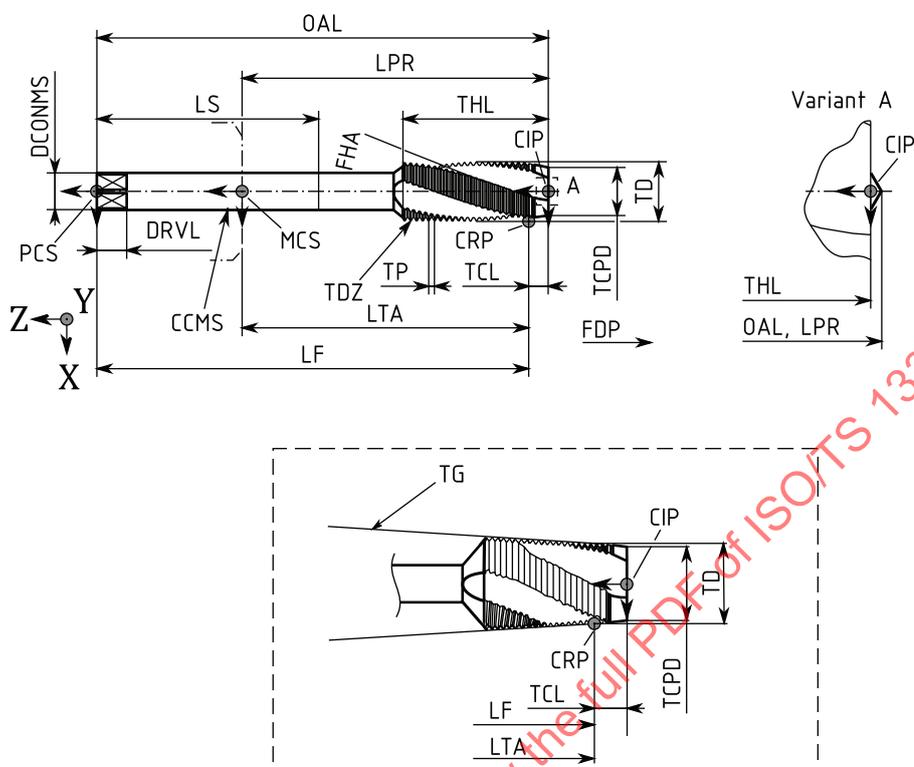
ISYC 301-01 - Thread cutting tap with cylindrical shank and drive key
